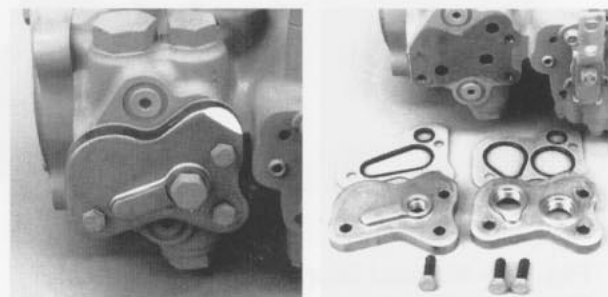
Filter Adapters and Gaskets (Later Production)
